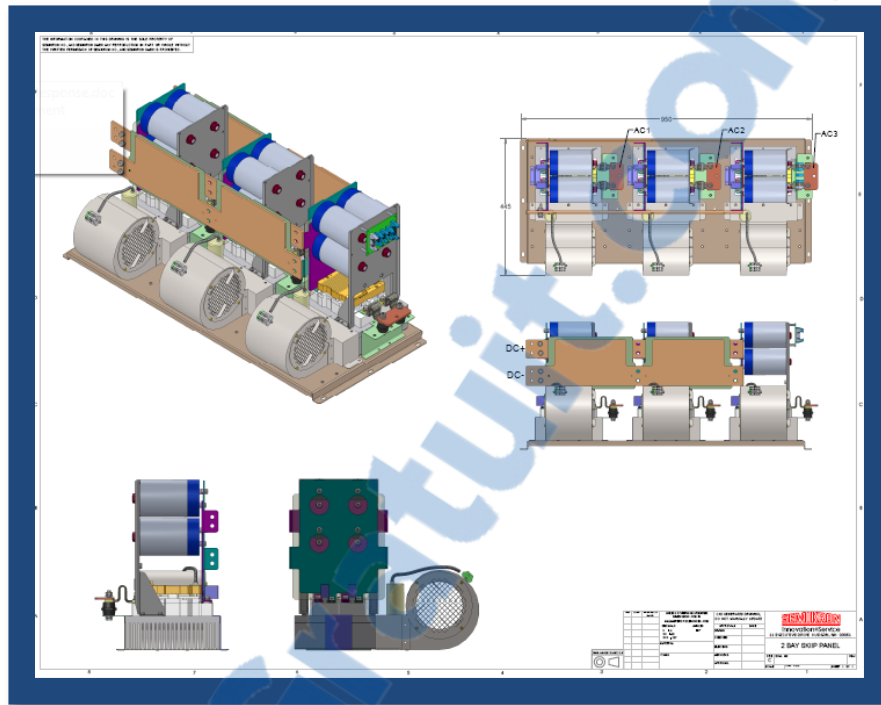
SKiiP1013 inverter assembly including gate driver, heatsink, capacitors, fan and bus dc sensor
